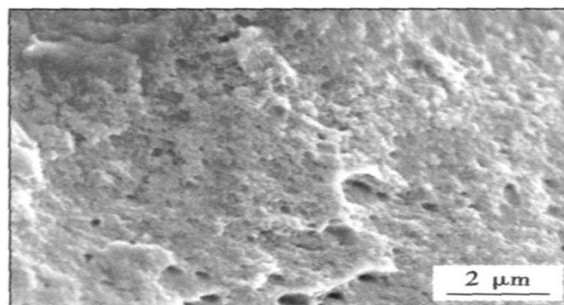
Fracture morphologies of SnAgCu soldered joints
